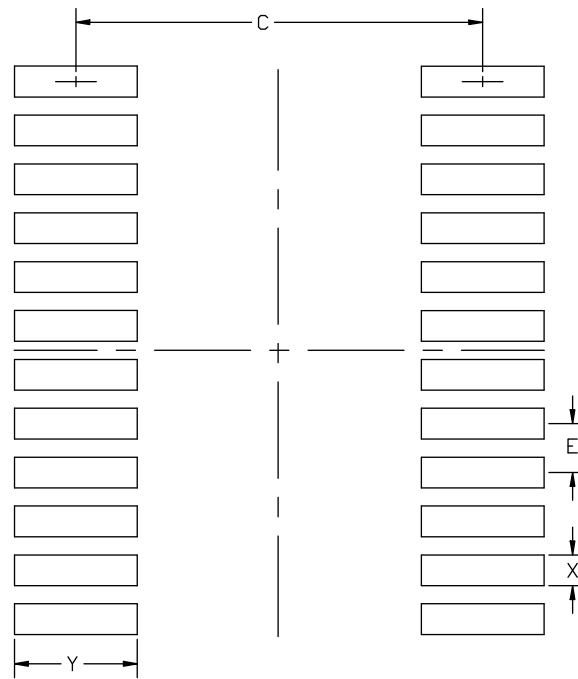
QSOP24 PCB Land Pattern Drawing
